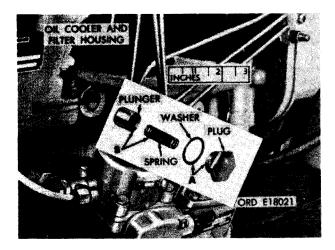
REMOVING, INSTALLING, AND INSPECTING OIL FILTER BYPASS VALVE.
